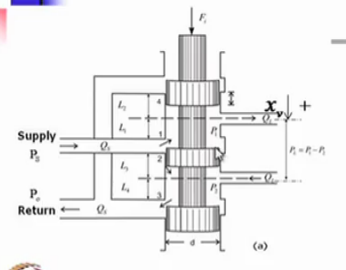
A typical Three-Land Four-Way Spool Valve
